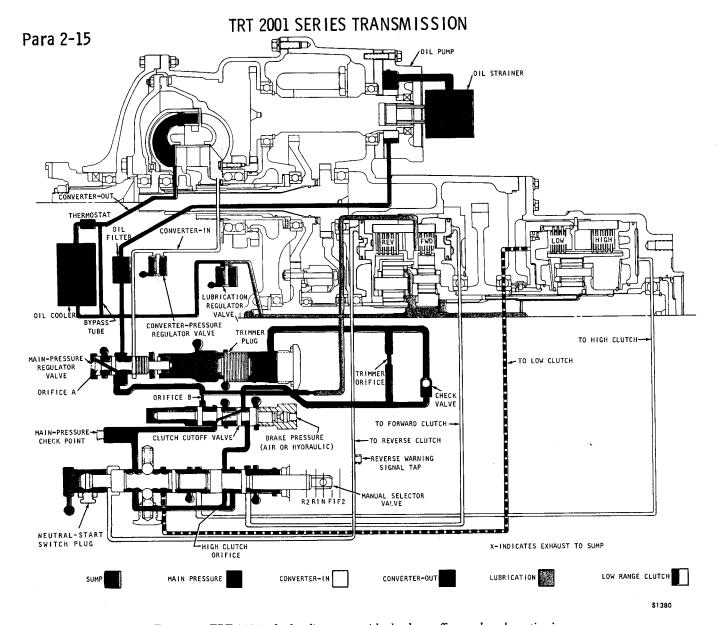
TRT 2221-1 hydraulic system with clutch cutoff control-schematic view
